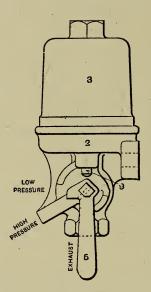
Three-Position Retaining Valve for Heavy Freight Cars.
